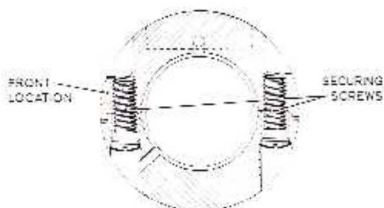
BRONZE ALLOY CENTRE BEARING FOR 8 CYL. PUMP CAMSHAFTS
